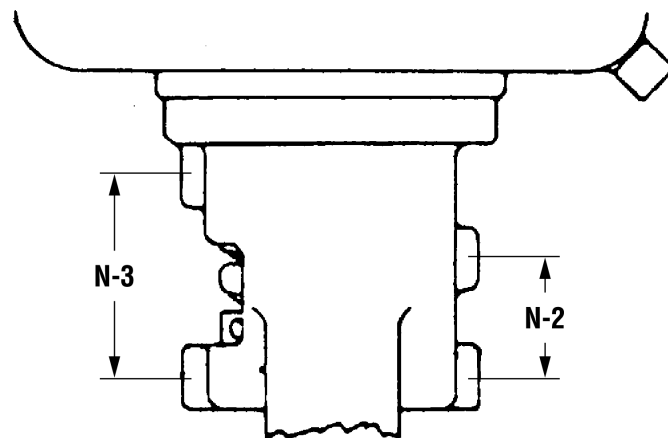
Reverse Acting Actuator Dimensions showing tapped hole location for valve positioner, micro-switch, mounting, etc.
